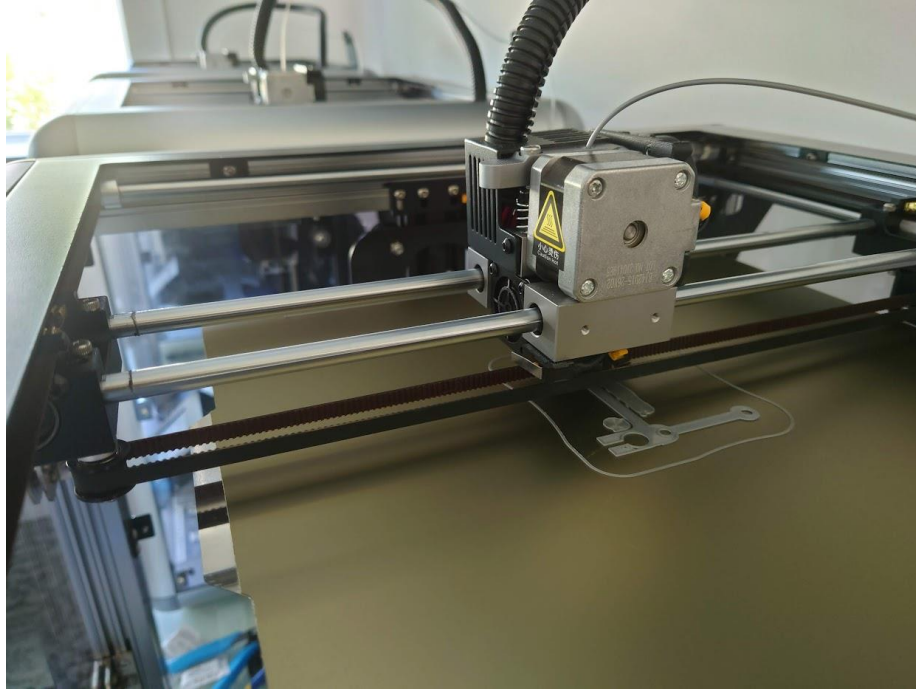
3D printing of fixtures used to mount modules on the physical frame.
